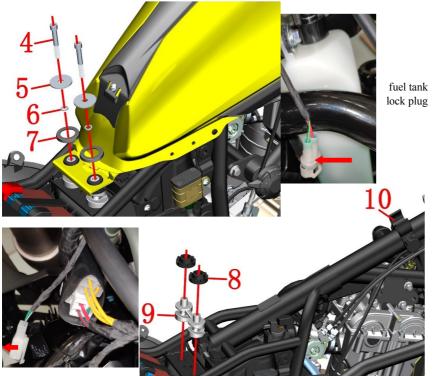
FU	JEL TANK	Fuel tank assembly	CHK	40)
